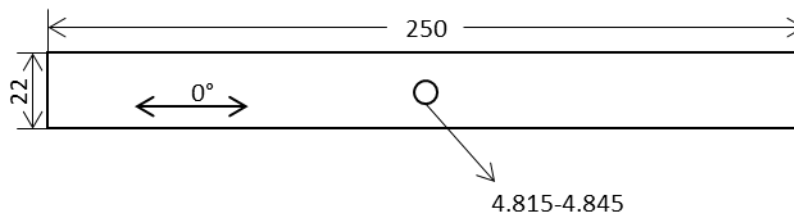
Coupon geometry for tensile test - OHT coupon, according to AITM1-0007. All dimensions are expressed in mm.
